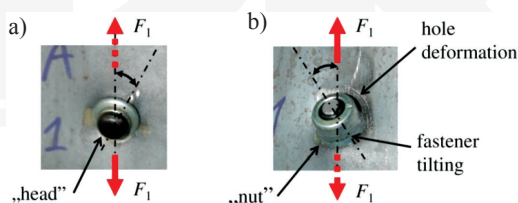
Hole deformation and fastener tilting observed during tests, view from: a) “head”, b) “nut” side
